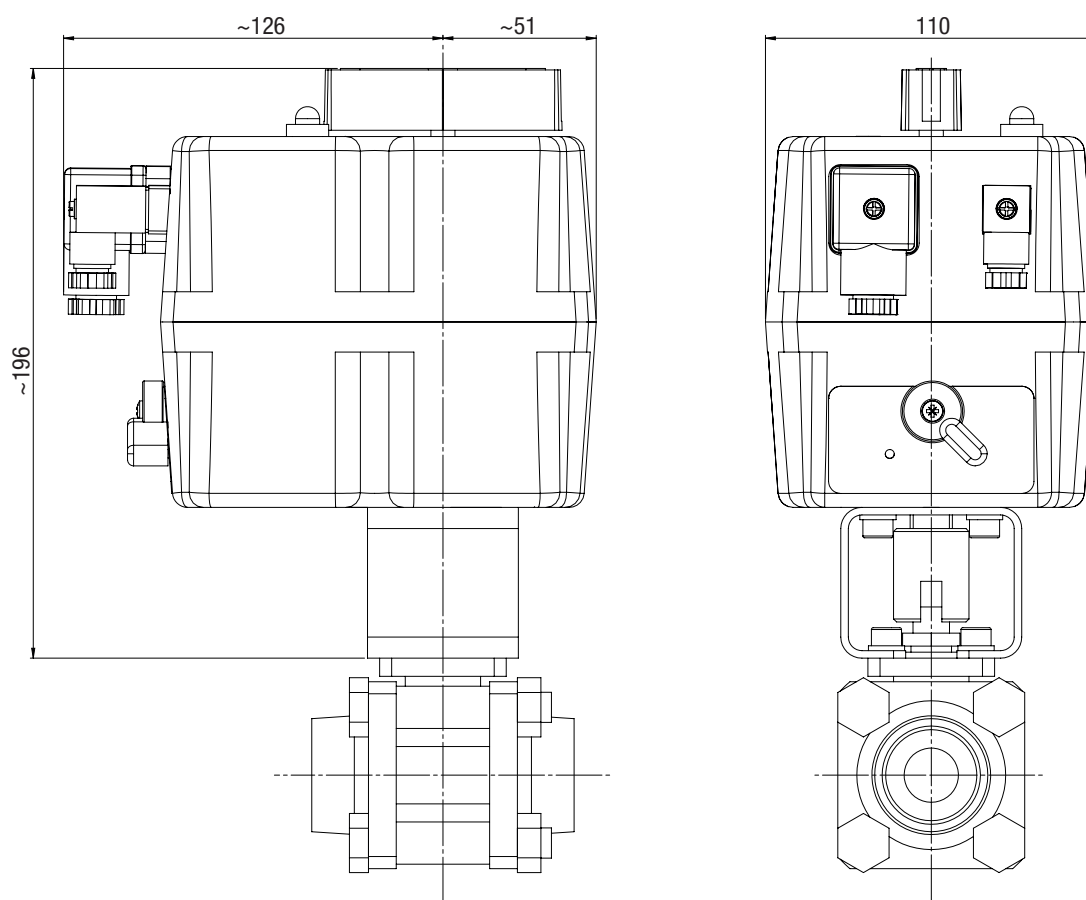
Dimensional drawing of the ball valve with internal thread and drive
